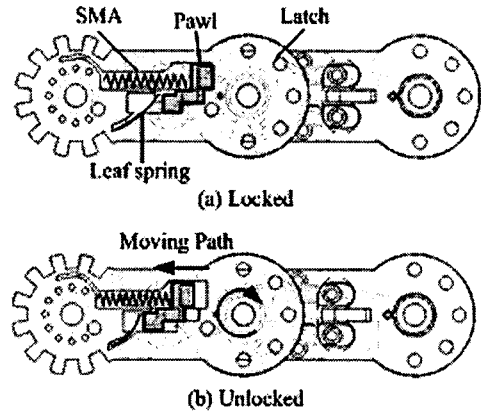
Locking mechanism composed of pawl, latch and SMA
